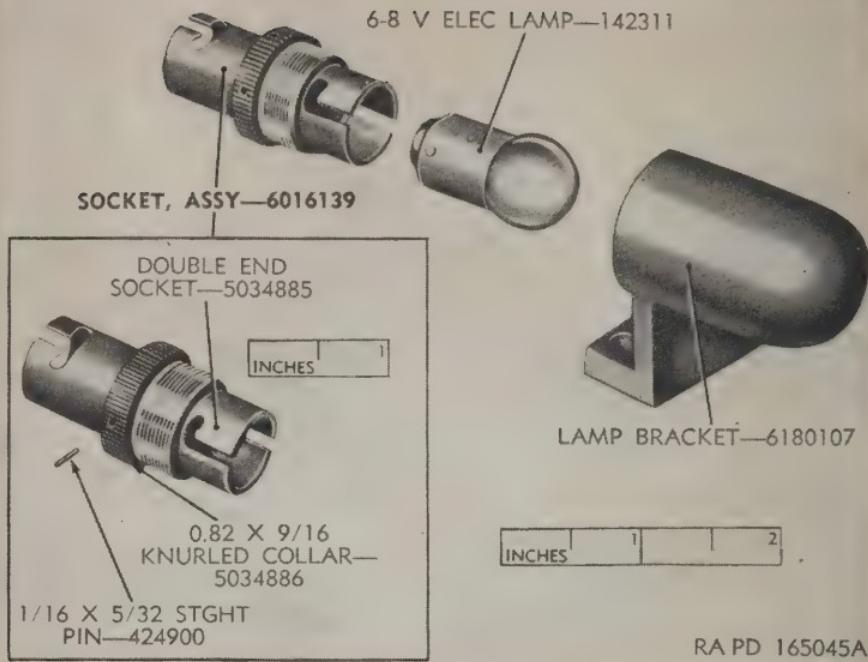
Telescope mounts M52C and M52D—socket assembly and related parts—exploded view.
